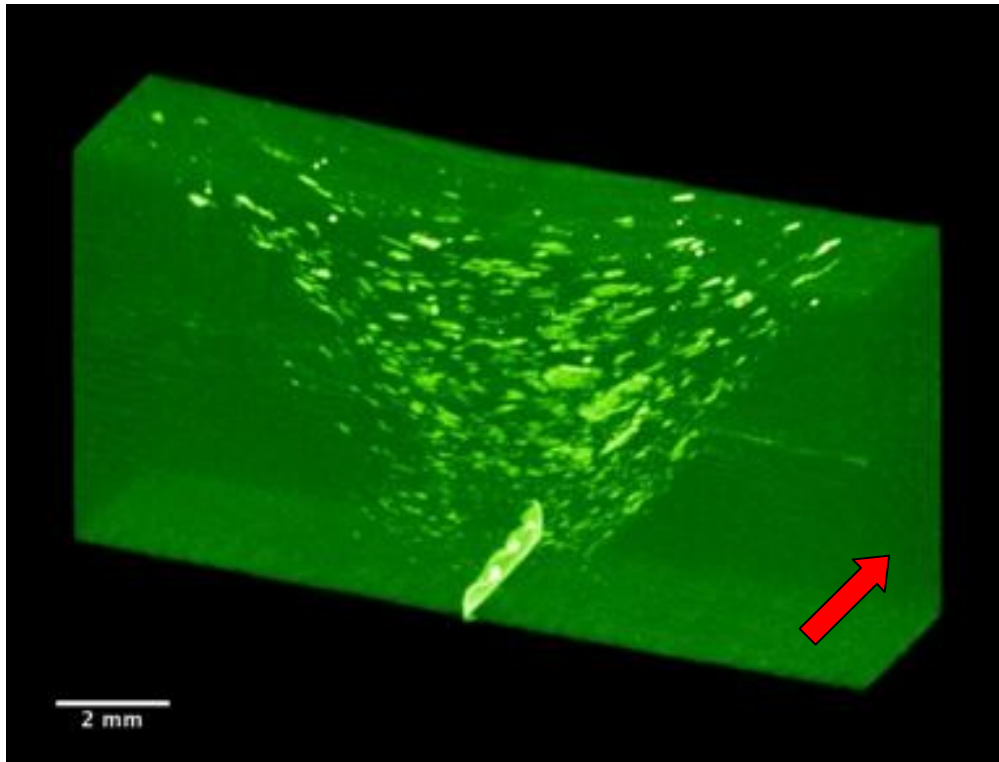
A 3D mean intensity projection of a CP Ti FS weld with Ni marker foil (bright areas). Weld direction is indicated by the arrow.
